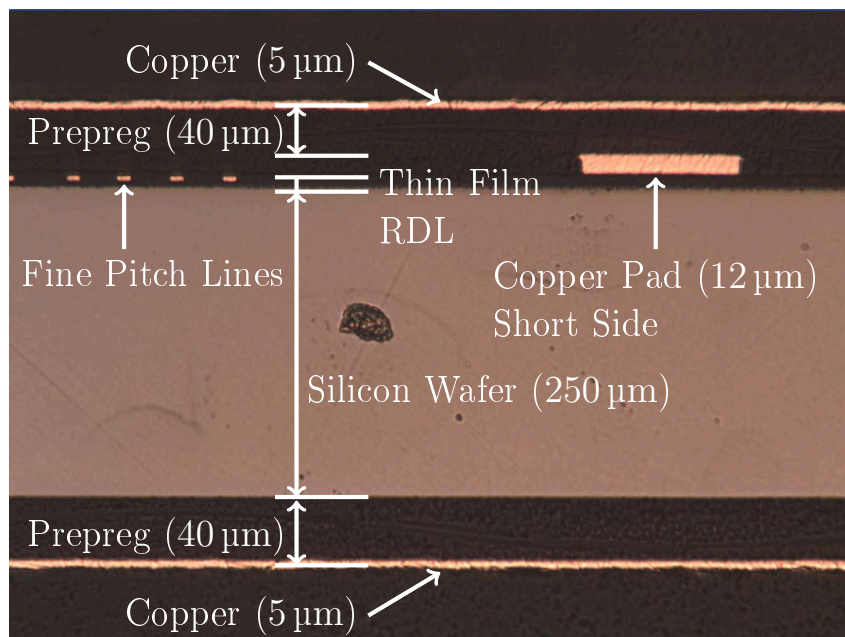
Cross section through the board. From the RDL the short side of a contact pads is visible. Courtesy of Kai Zoschke (IZM).
